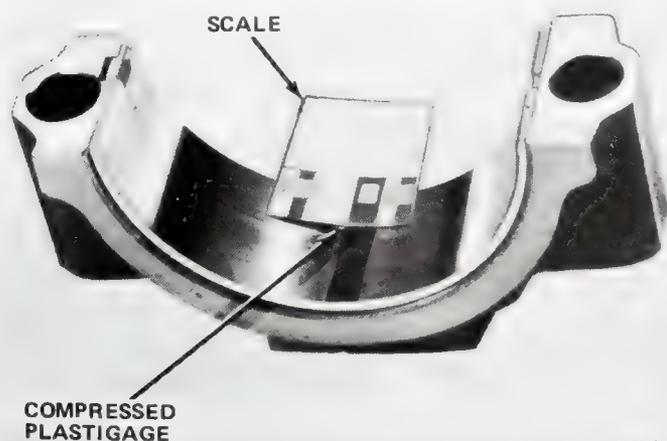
B-159 Connecting Rod Bearing Clearance Measurement with Plastigage
